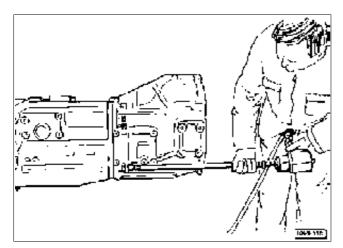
Secure the intermediate housing, torquing the bolts to 14 kgm.
